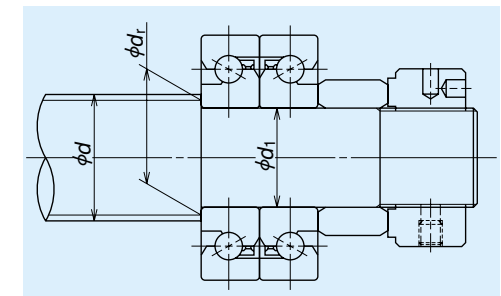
2 Support bearing and end face (shoulder) for installation
